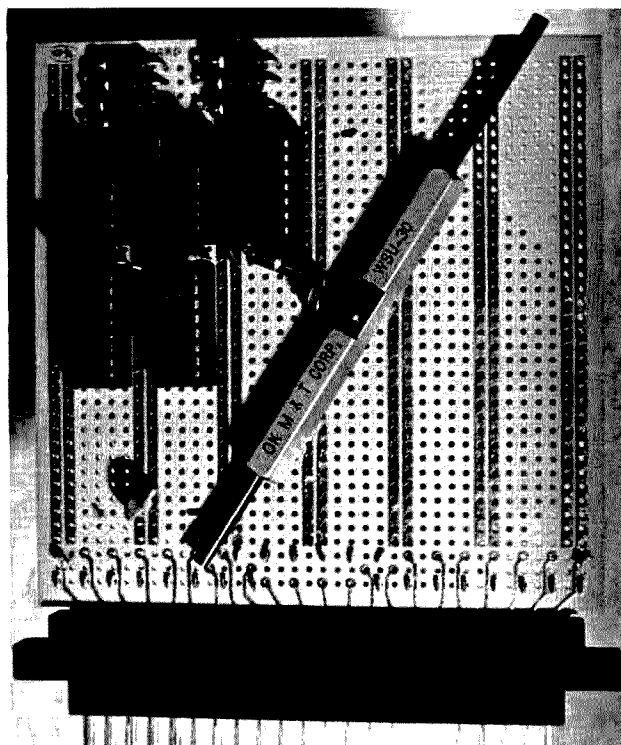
Photo C. The scanner only takes up a small area on the Hobby Board. The wrapper, also by OK Machine & Tool, tied it all together.
